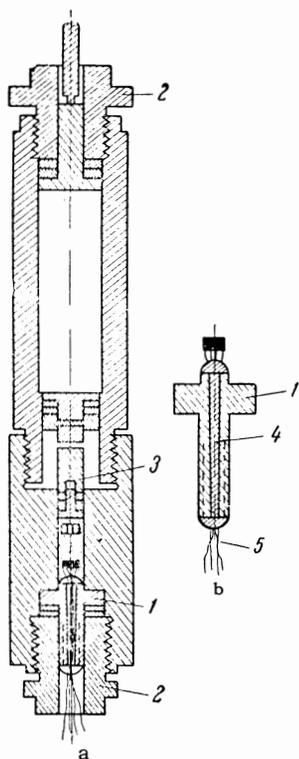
a) General view of the pressure booster: 1) flanged plug; 2) screw plug; 3) piston plunger. b) Plug 1 with sample mounted on it: 4) Araldite resin; 5) electrical leads.
